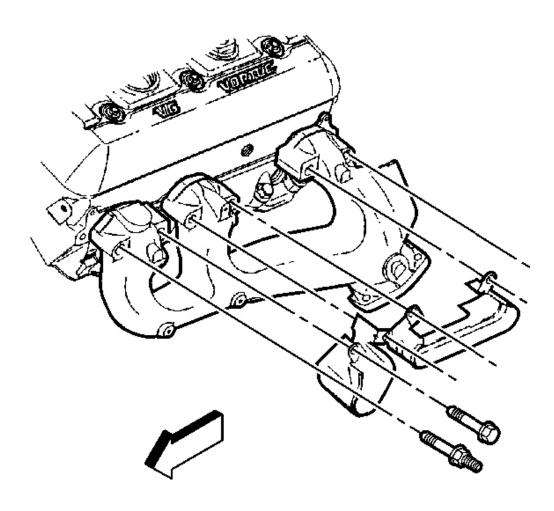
View Of Exhaust Manifold Bolts & Studs Courtesy of GENERAL MOTORS CORP.
